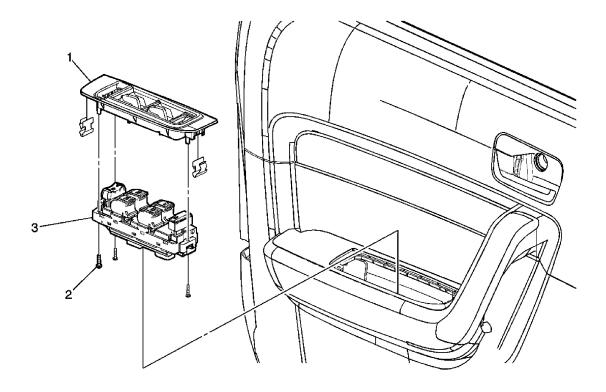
View Of Driver Side Door Lock/Side Window Switch Courtesy of GENERAL MOTORS CORP.
